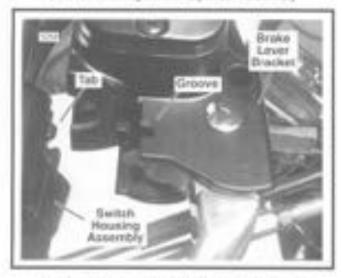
Fit Brake LeverMaster Cylinder to Right Handleber Switch Housings
